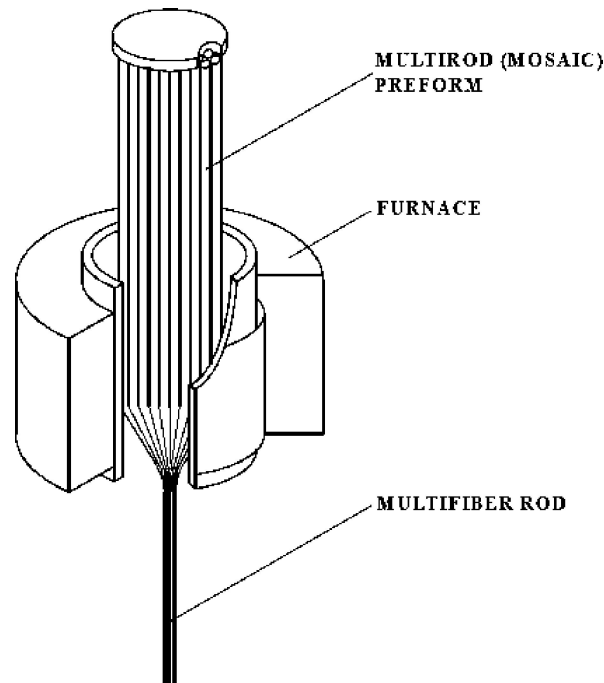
Stack-and-draw preform shown within furnace drawing down to cane [51].
